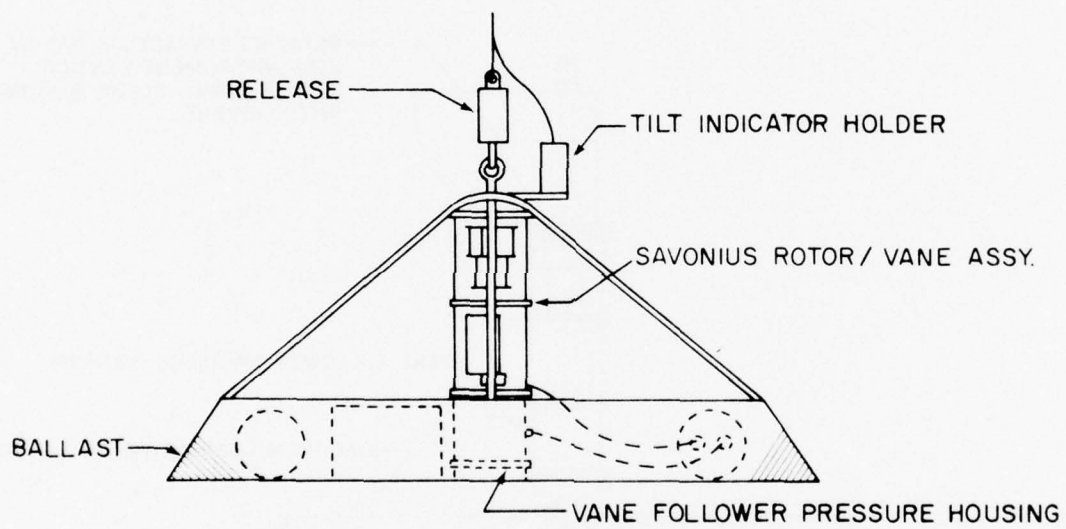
Modified Meter Housing With Rigid Deflector Frame
